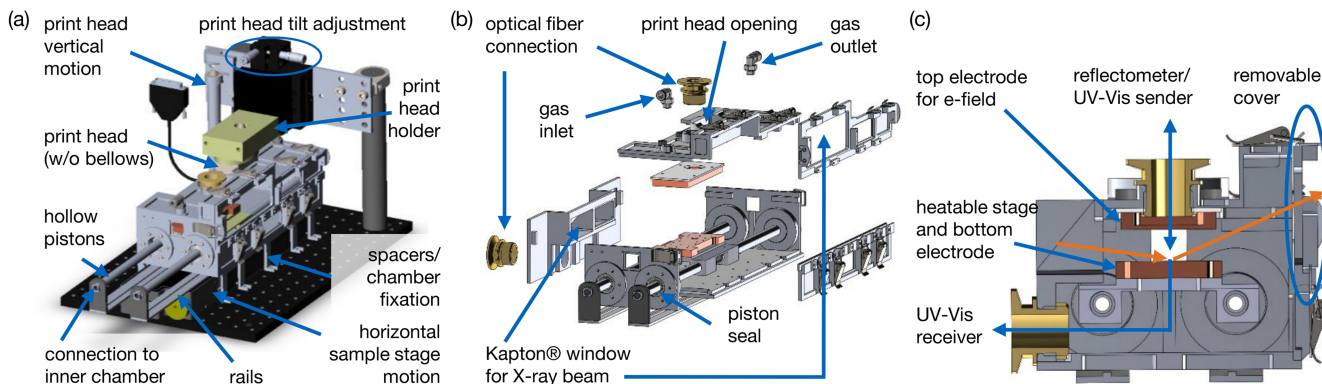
(a) Isometric view of the fully assembled printer setup including the printing unit and the environmental control chamber. (b) Exploded isometric view of the atmosphere chamber with most important functional parts. (c) Sectional front view on the sample stage and the connection possibilities for optical fibers for *in situ* reflectometry or UV-Vis measurements. The orange arrows schematically depict the X-ray path relative to the chamber.
